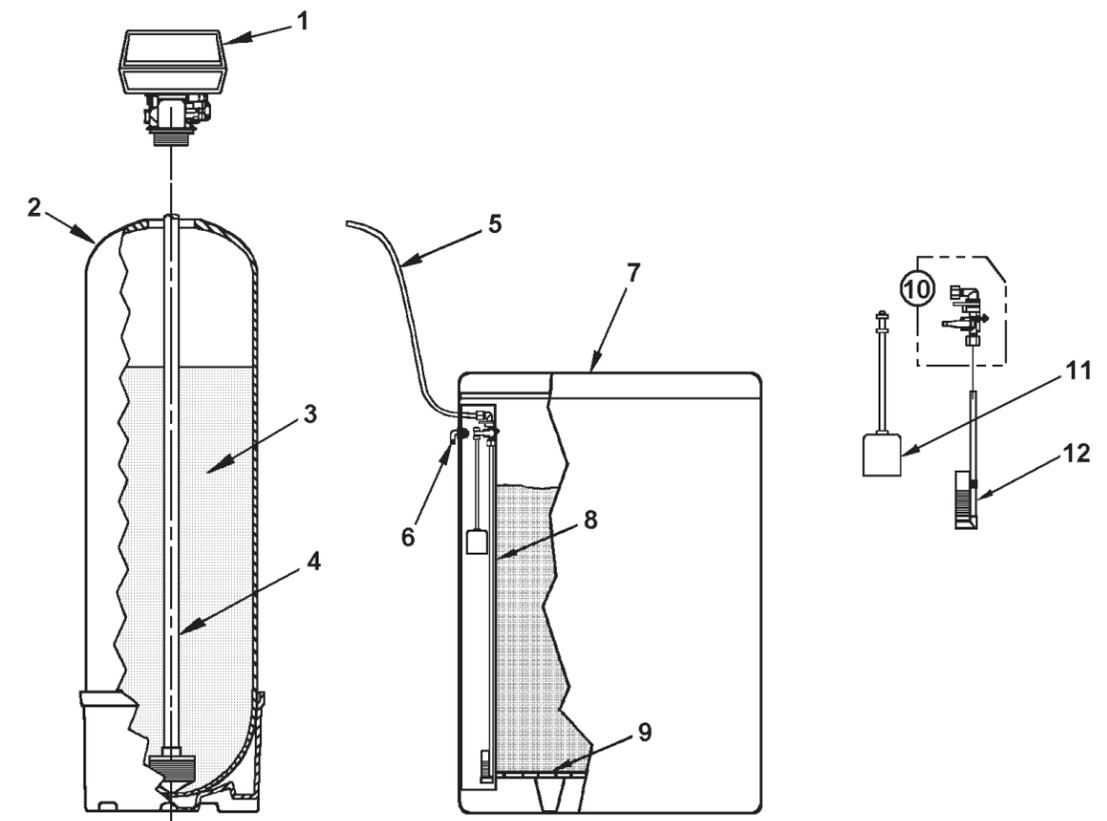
SOFTENER AND BRINE TANK ASSEMBLY, TOP VIEW
